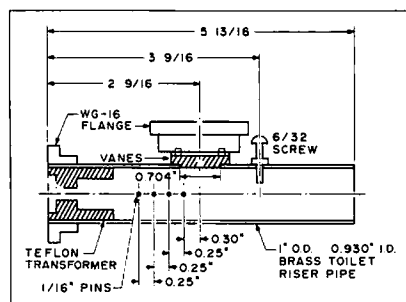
Cut-away profile of the circular waveguide, with the Teflon™ piece inserted.
